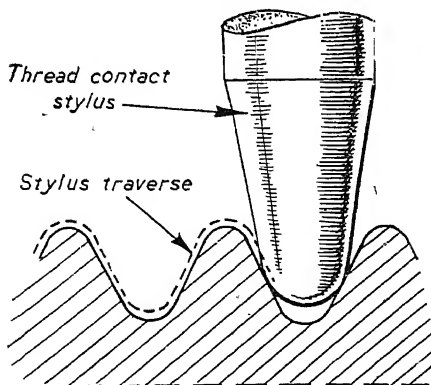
Thread flanks in contact with stylus of pitch-measuring machine.
